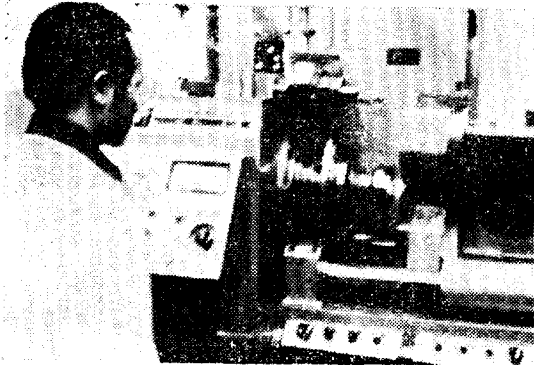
View of inertia welding on Inertia Welder at the Production Technology Inc., Illinois.
